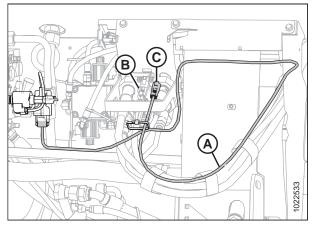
Routing Valve Driver Harness – John Deere Completion Shown
